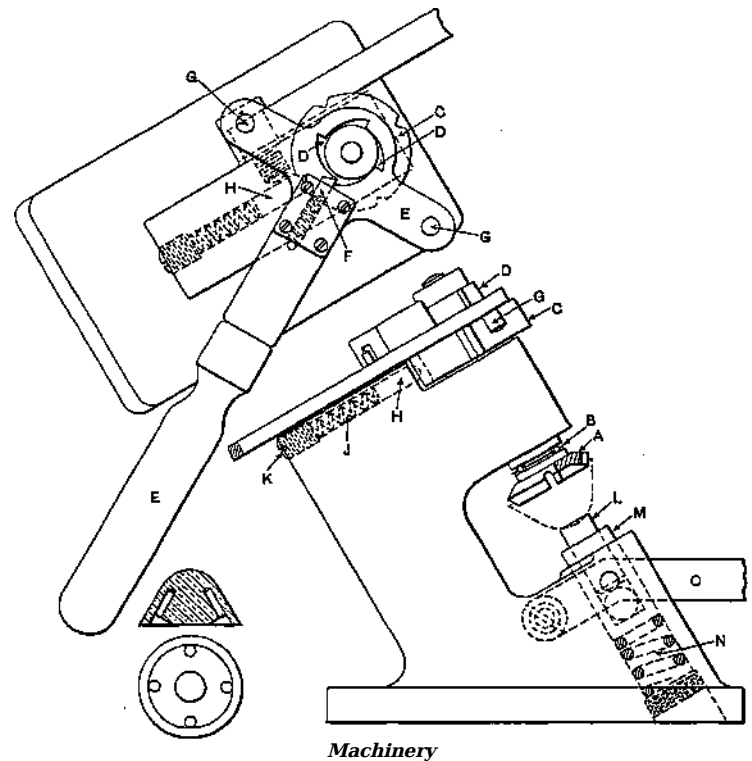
Indexing Fixture operated by Hand-lever and Foot-treadle
